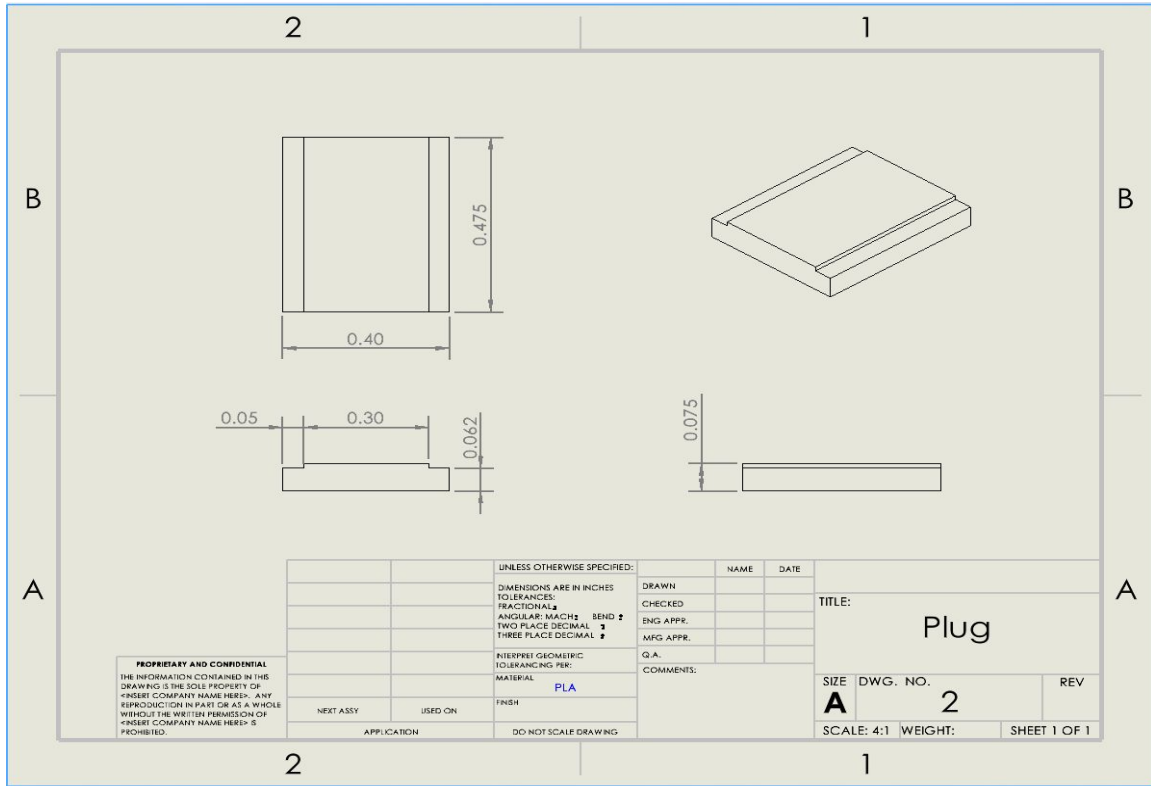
The dimensioned engineering drawing of the bottom slot plug
